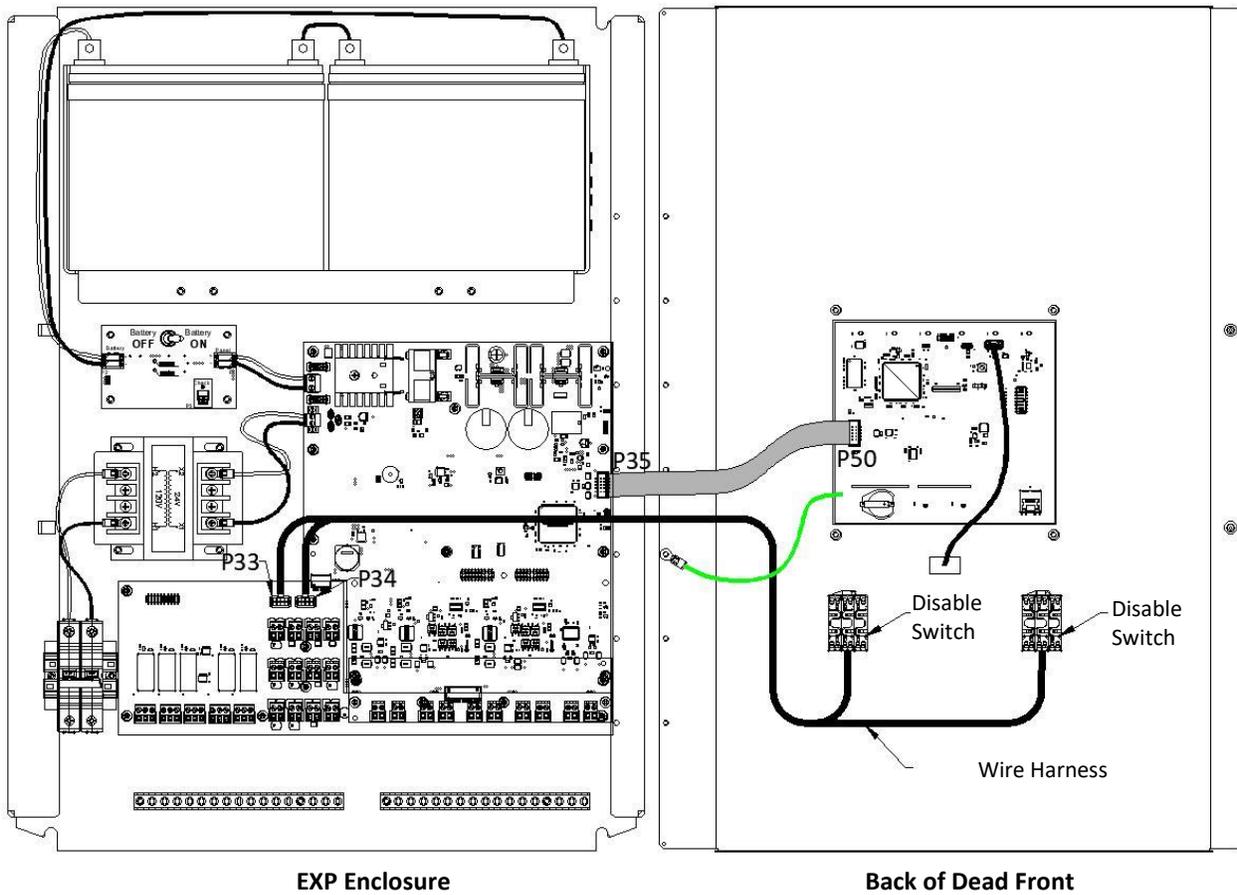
Panel-Mounted Zone Disable Switch Wiring
